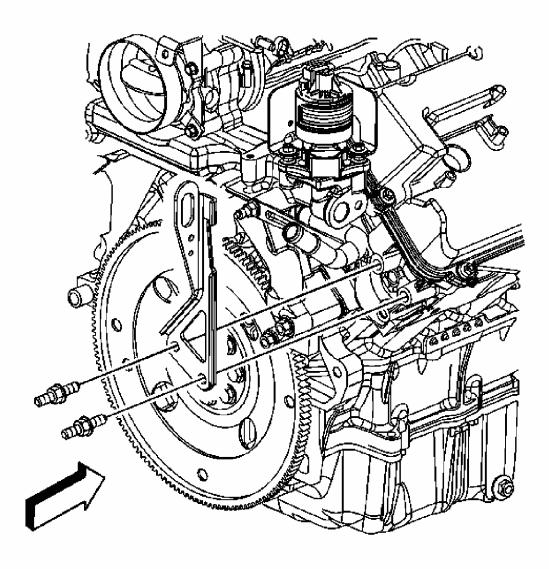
Identifying Engine Rear Lift Bracket Studs Courtesy of GENERAL MOTORS CORP.
